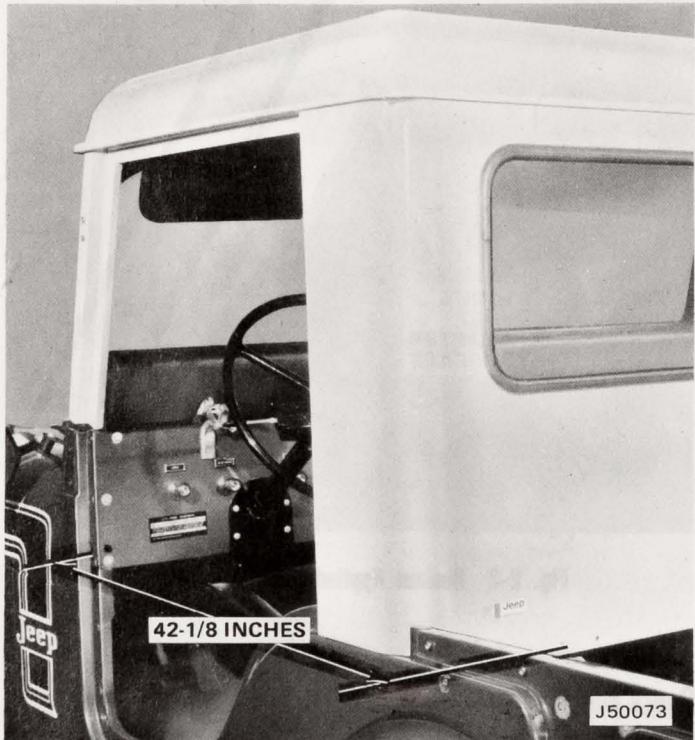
Roof-Rear Panel Assembly Installed—Rear View
